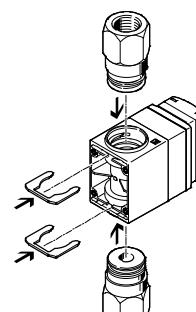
Mounting fluid connection: Check that the O-ring is seated correctly.
